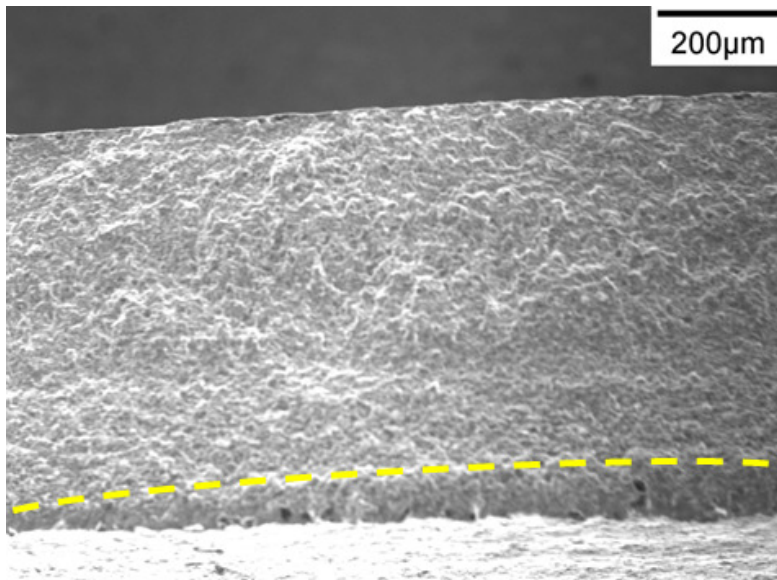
5 Wing 2-Ti-6Al-7Nb-1 wing fractured surface 100X
